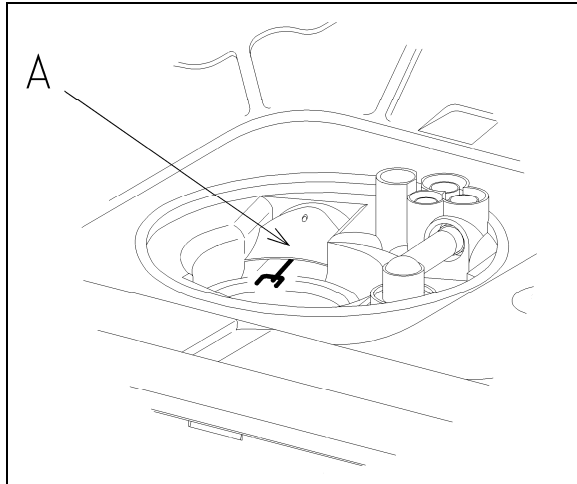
Engaging the Prongs in the Circulation Pump Impeller
